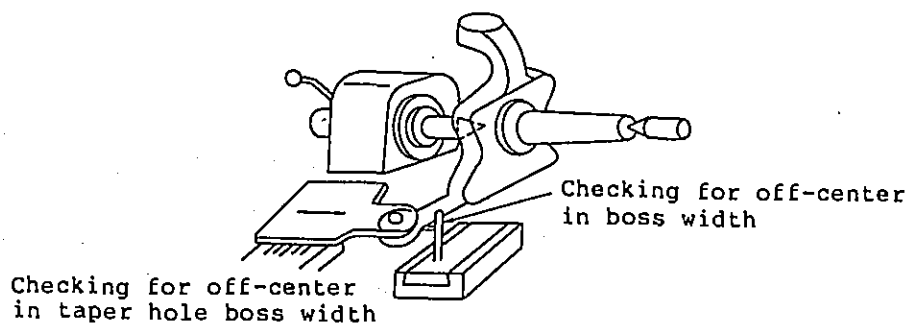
Measure 3 Checking Device of Machining Reference Center
